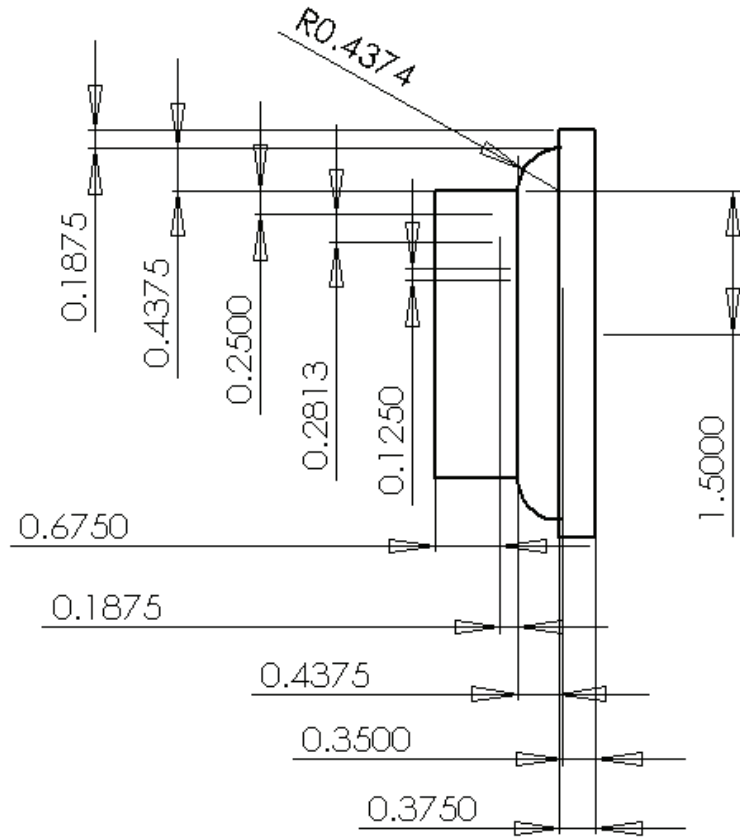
Mechanical drawing of the side view of the *right hub.sld
